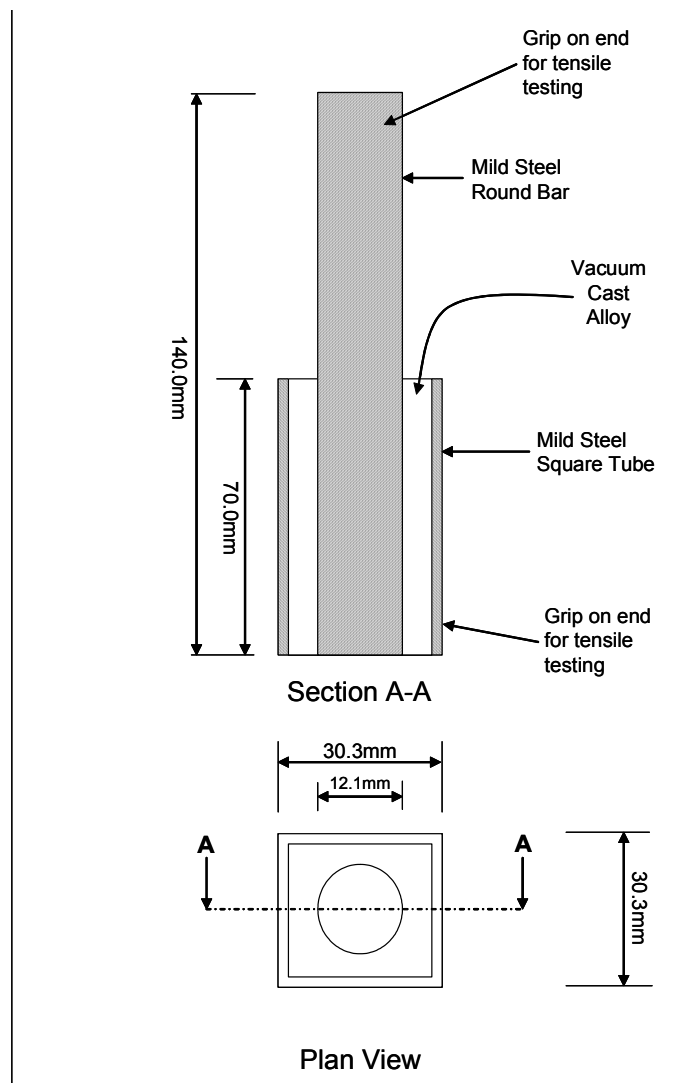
Vacuum cast composite tensile test sample dimensions
